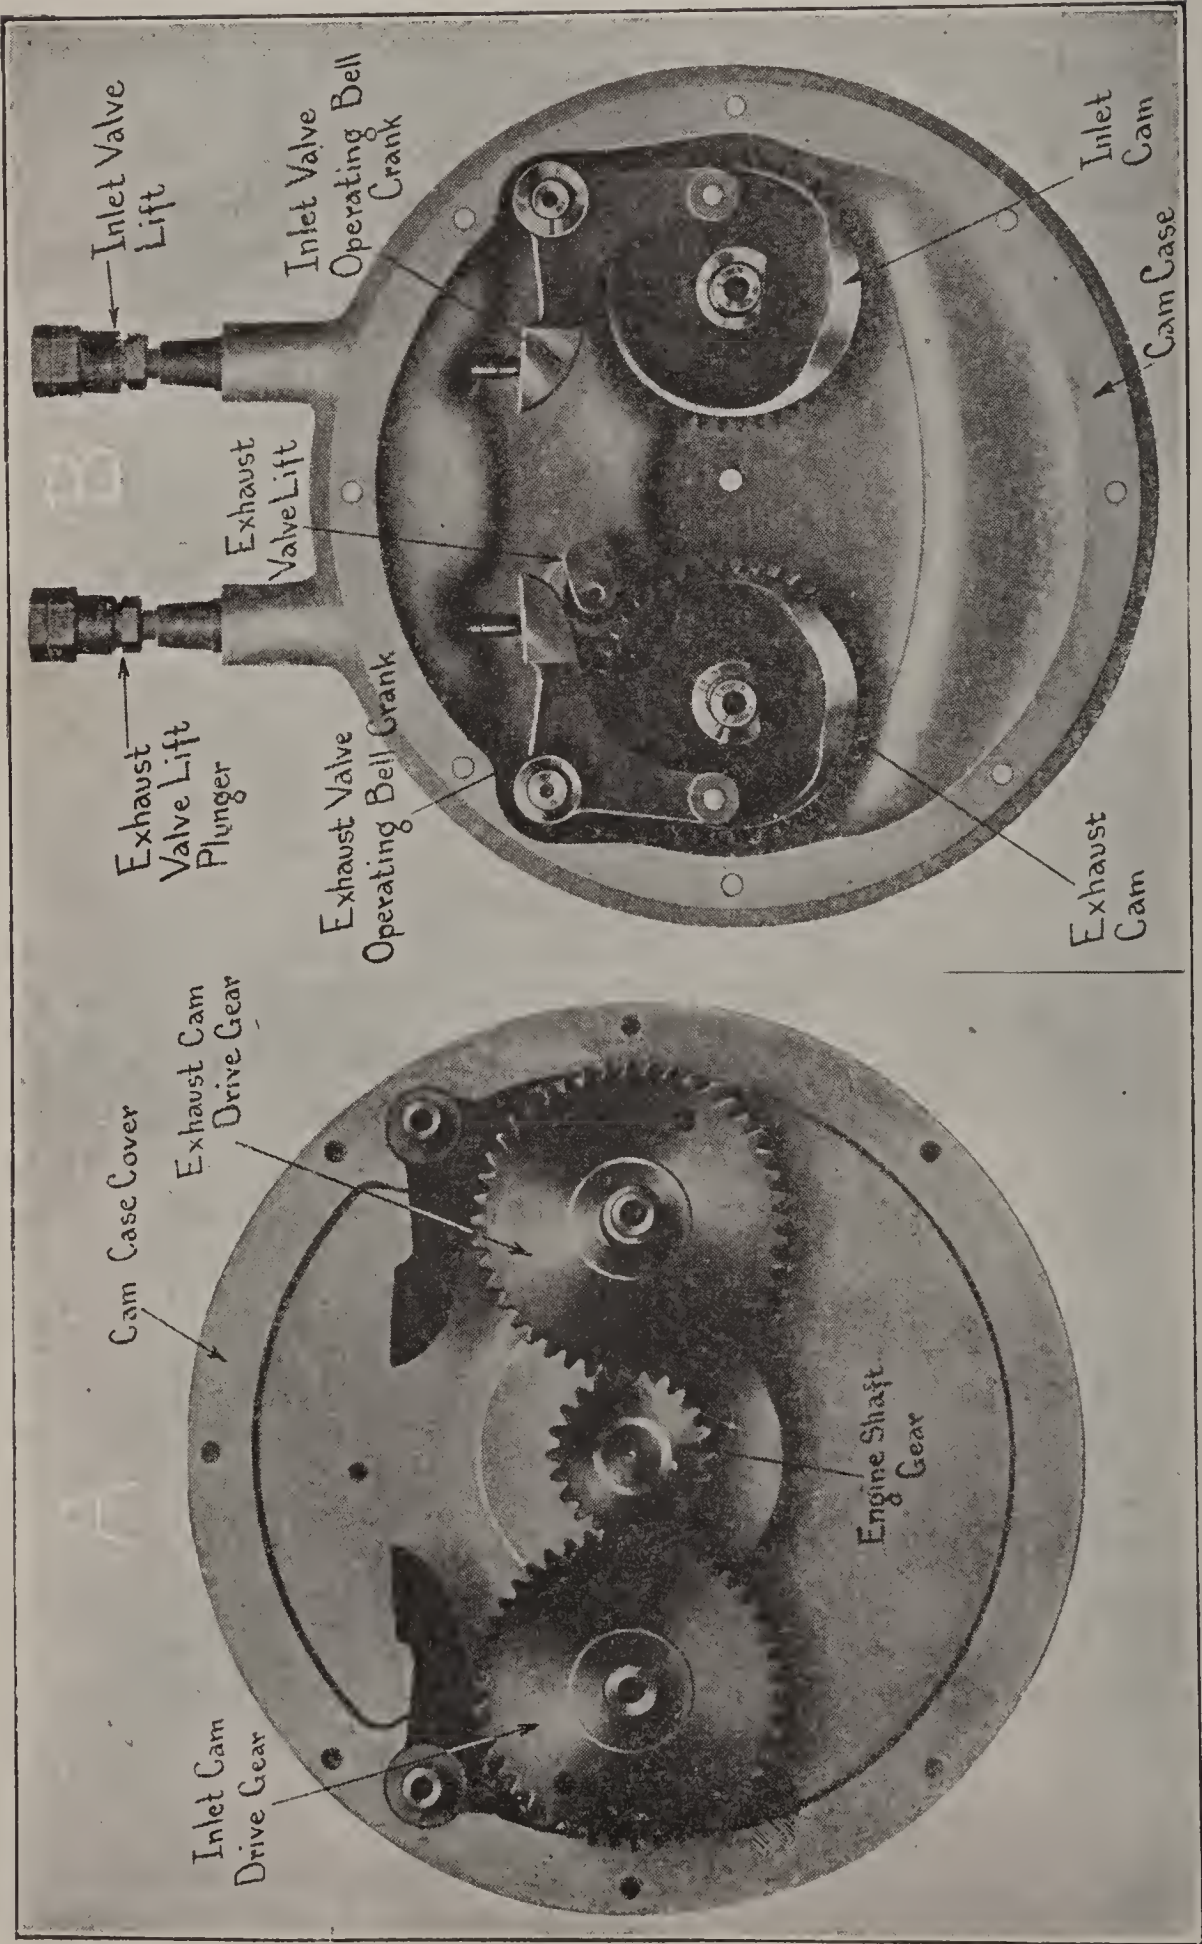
Valve Operating Mechanism of Precision Overhead Valve Motors. A—Showing Cam Drive Gear Arrangement. B—Form of Valve Operating Bell Crank and Internal Cams Used.
